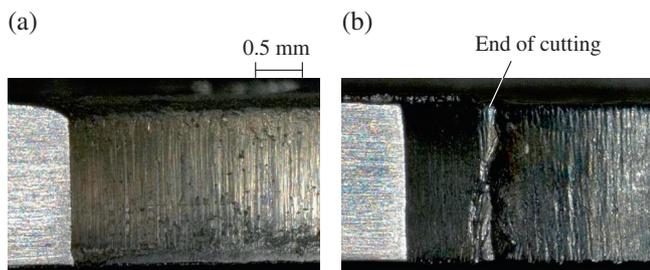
Surfaces of holes after (a) cold scrap removing for $c = 0\%$ and $r = 10\%$ and (b) laser cutting.
